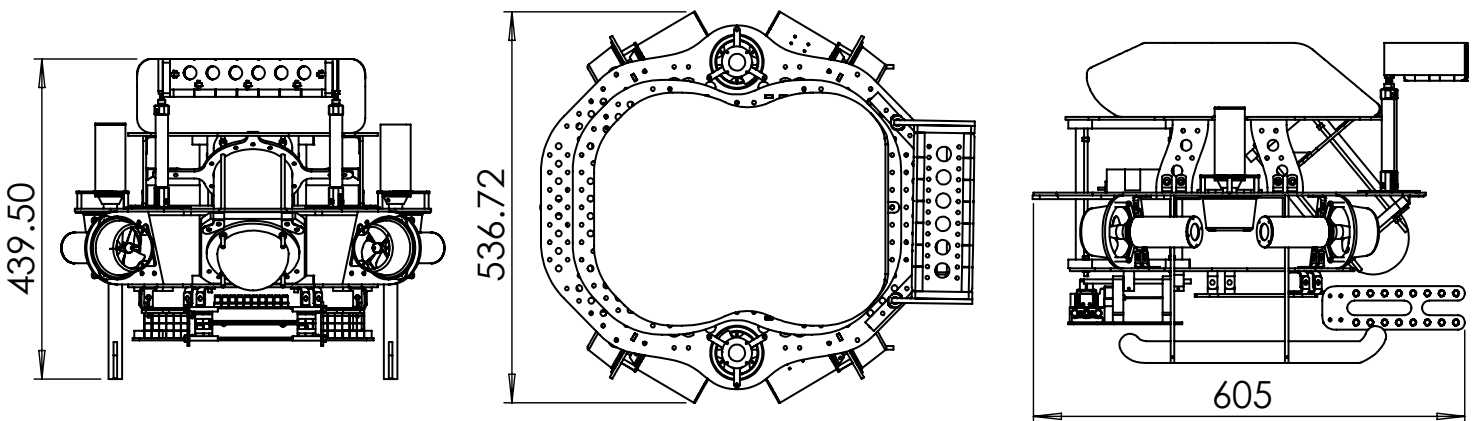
CAD drawing of the Stingray with Mission 1 manipulators (dimensions in mm)
